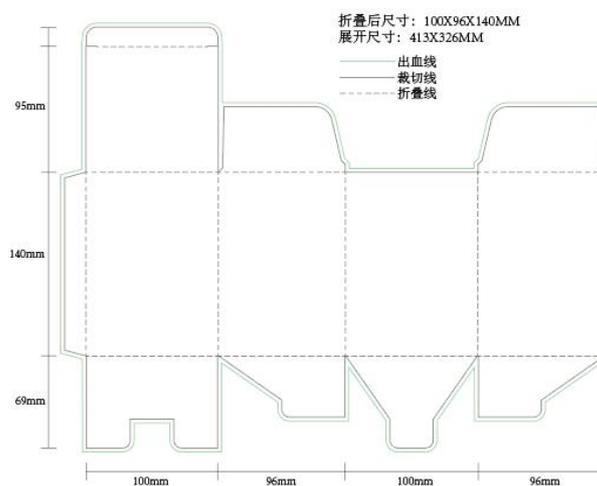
Manual packaging box design (inner box knife mold drawing completed draft)
